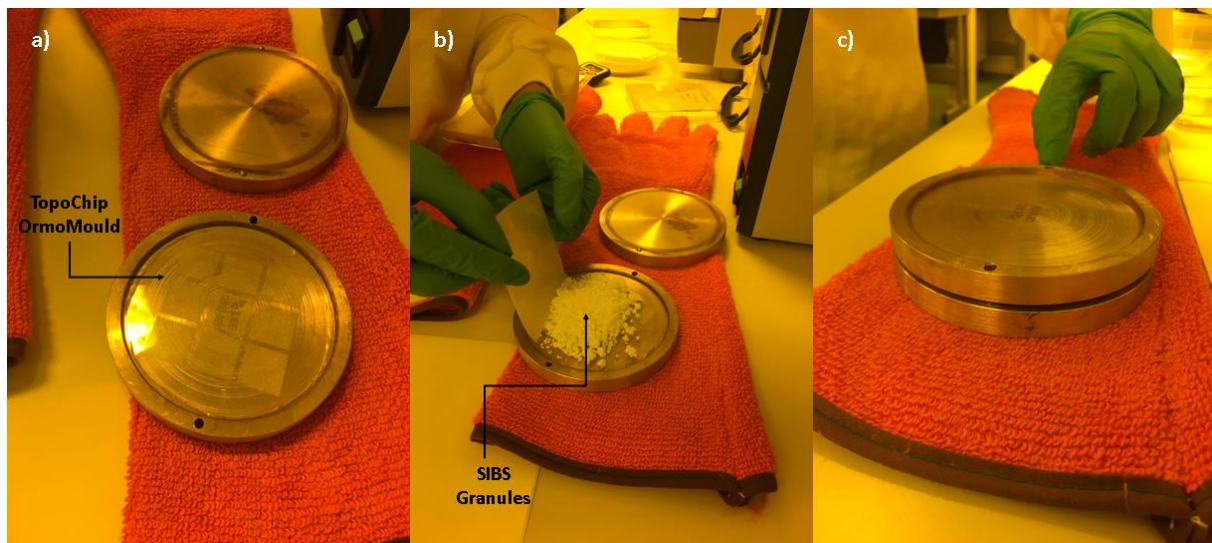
(a) A TopoChip OrmoMould, (b) SIBS 2000 being placed on top of the OrmoMould, (c) A SIBS sample ready for hot embossing.
